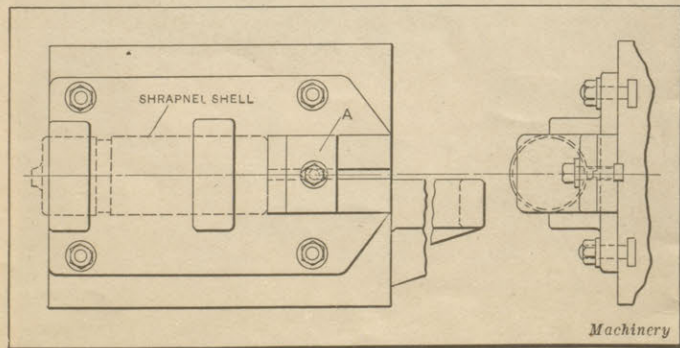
Fixture used on Besly No. 14 Ring Wheel Grinder for grinding Center End from Shrapnel Forgings
